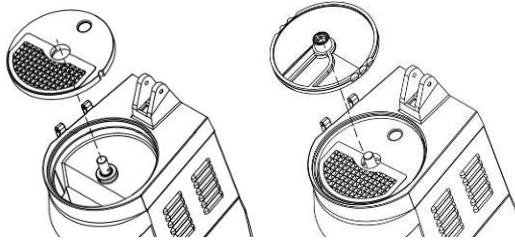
Installation of pair of cutting disks PS...-DF...
